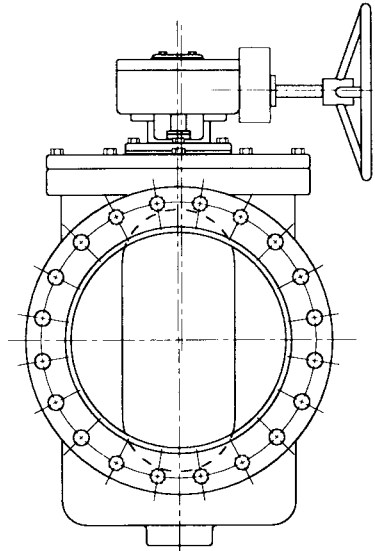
PLUG VALVE WITH GEAR ACTUATOR
